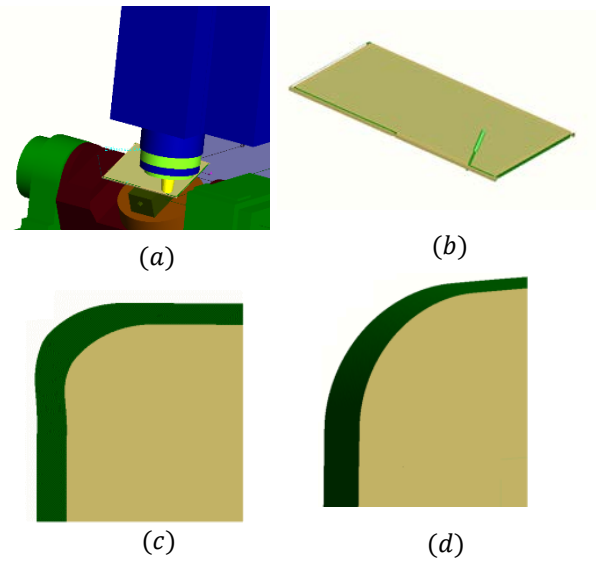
Simulation of a five-axis XYZAC-type machine: (a) machine view, (b) workpiece view, (c) corner machined through nonconstant-speed tool-axis-orientation planning by using the quaternion slerp method, and (d) corner machined through constant-speed tool-axis-orientation planning by using five-axis slerp method.
